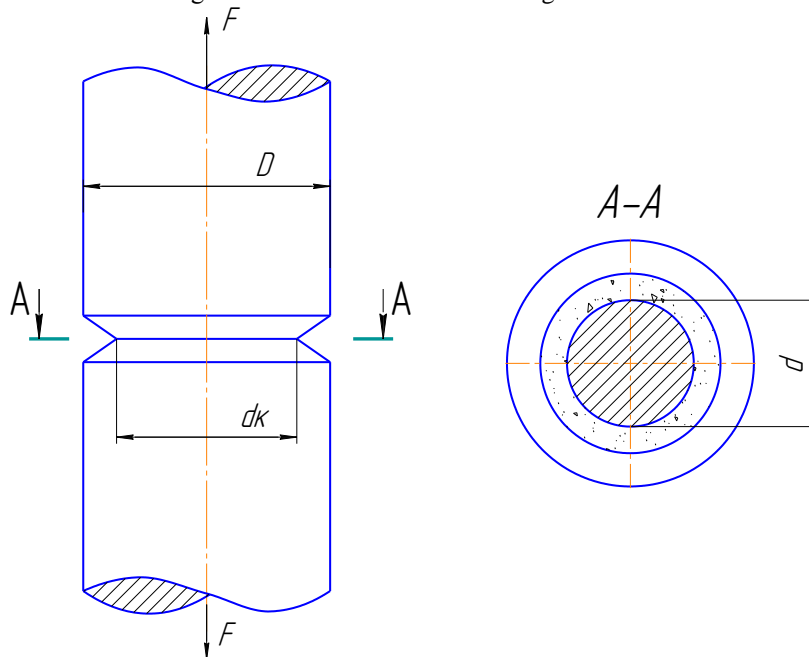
Scheme of axial tension of a test cylinder with a ring crack
